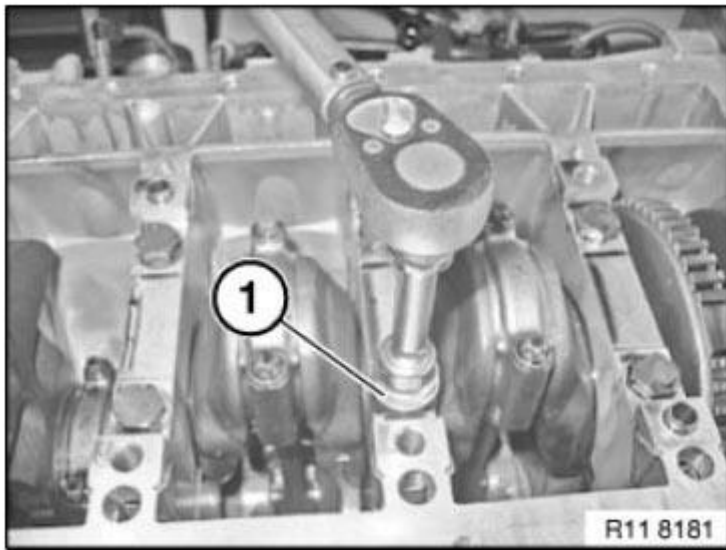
Positioning Crankcase Lower Section On Crankcase Upper Section
